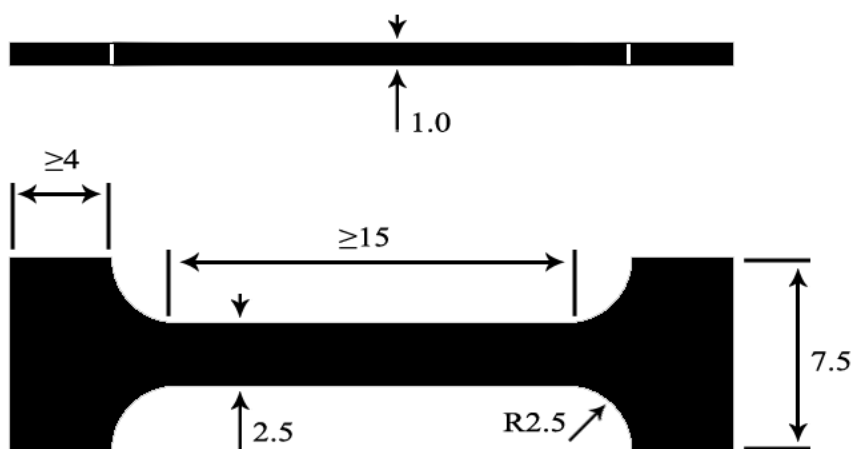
Tensile test sample rod geometry used by Zhang et al., 2024.
